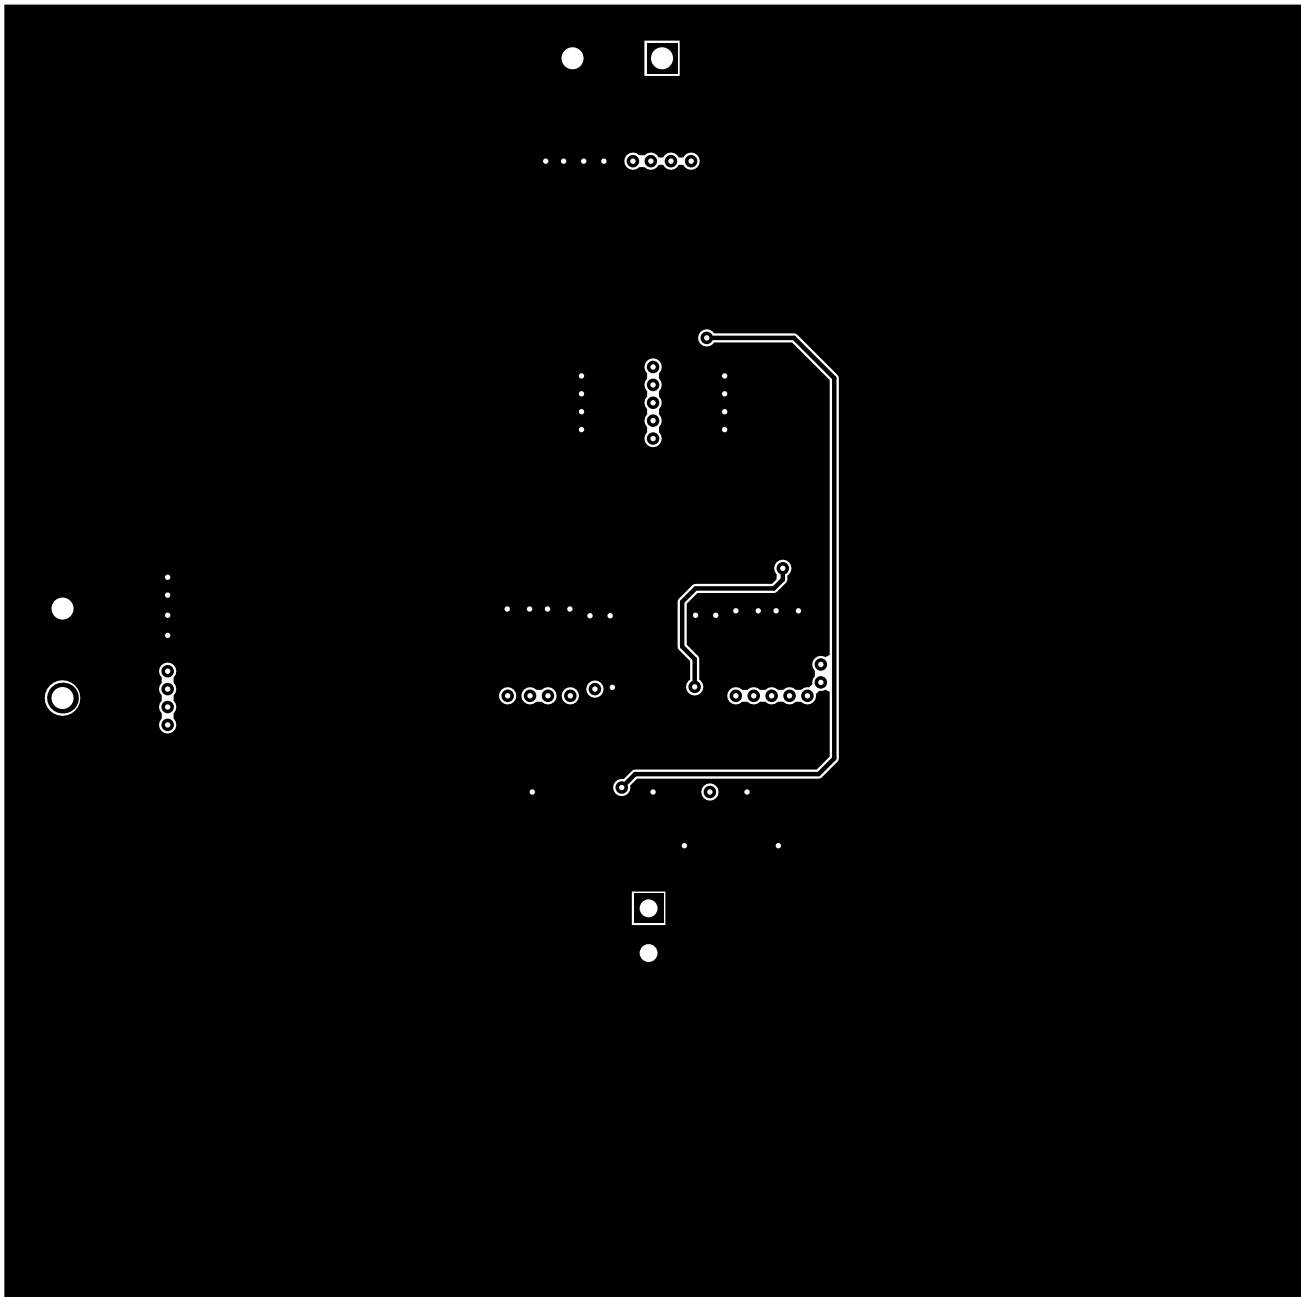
TPS568215EVM-762 Bottom-Side Layout
